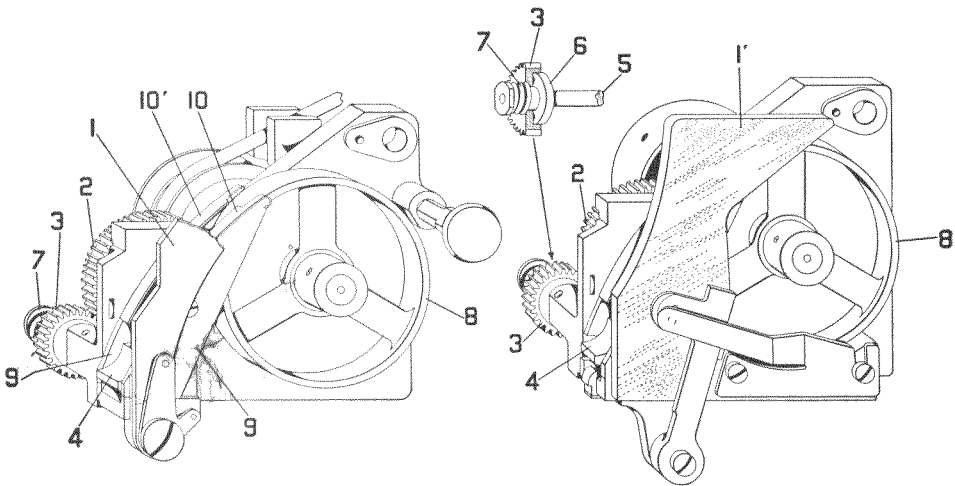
View showing the details of the assembler block. In this figure, 1 is the assembler cover which is shown broken away in the left-hand view; 2 is a gear connected by a belt to the intermediate shaft, which drives a smaller gear 3 at a high speed. The smaller gear 3 is mounted on a shaft, upon which shaft is mounted the star wheel 4. Gear 3 is not fast upon the shaft 5, but is held against a friction disk 6 by a spring 7. The friction disk 6 is fastened upon the shaft 5. If anything, such as a clog of the matrices, occurs which stops the action of the star wheel, the shaft 5 stops, while the spur gear 3 continues to revolve. The slipping action of the gear 3 against the friction disk 6 is to prevent the breakage or bending of the matrices in the case of a clog at the star wheel.
